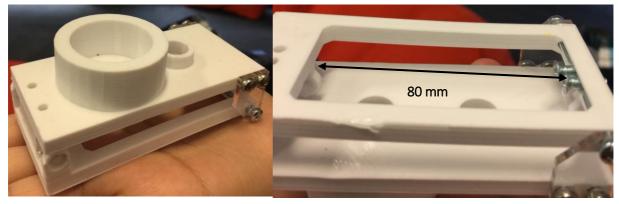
MANUAL PLACEMENT OF TRANSDUCER 3D PRINTED MODEL
